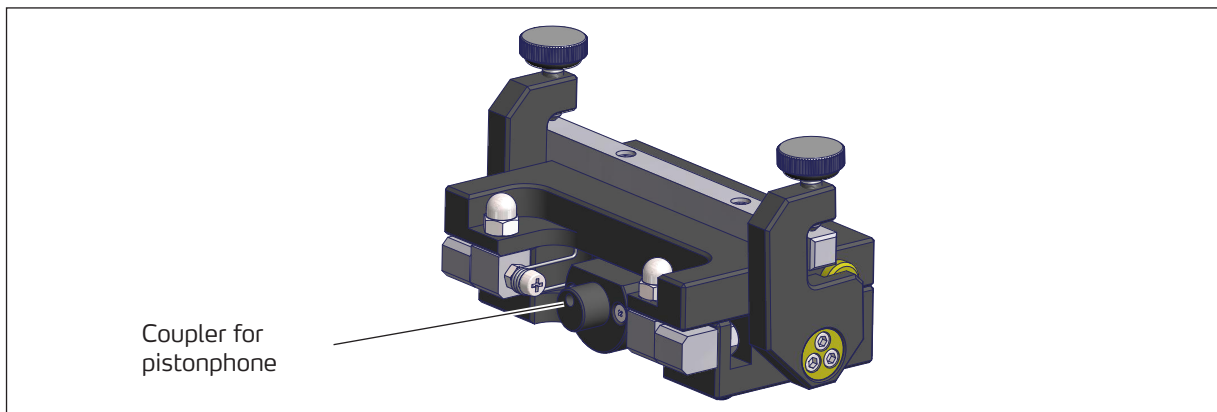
Rear view of the calibration adapter and the coupling for the pistonphone.
